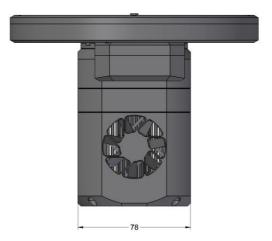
C1× camera head with External filter wheel bottom view dimensions 42
